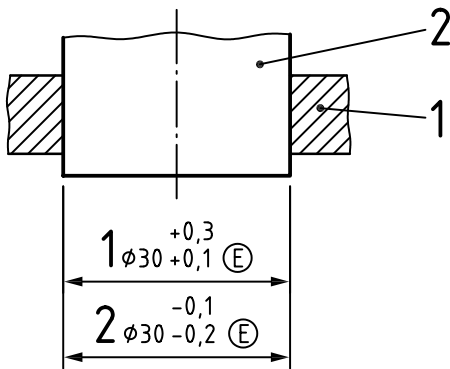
Example of assembly drawing with plus and minus tolerancing of two features of linear size in a fit
